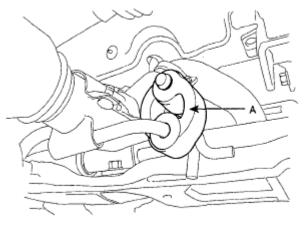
Identifying Roll Stopper Mounting Bolts (2 Of 2)
